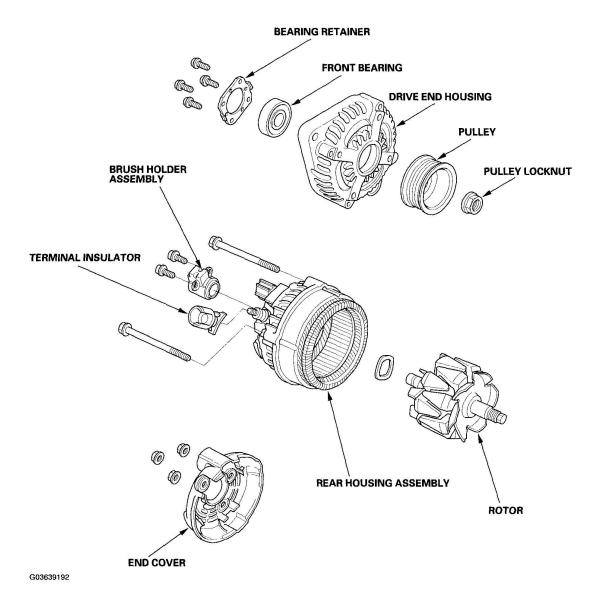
Exploded View Of Alternator Courtesy of AMERICAN HONDA MOTOR CO., INC.
